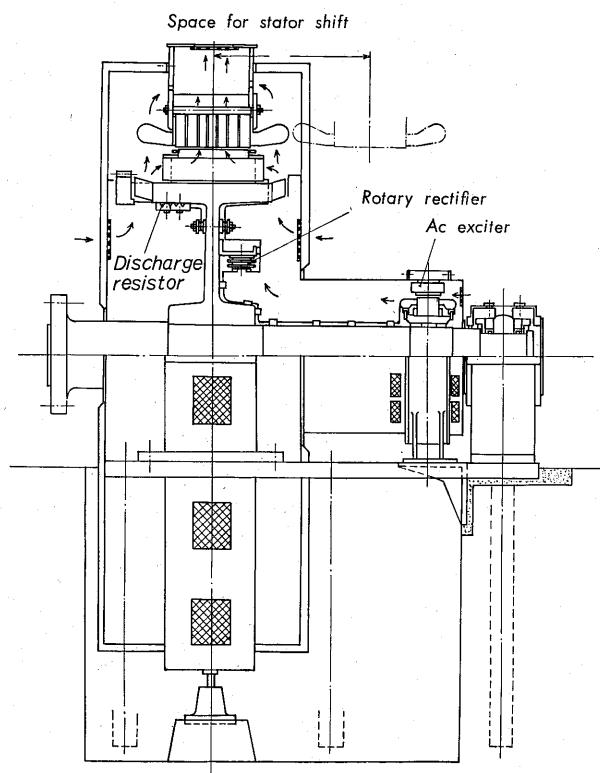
Sectional view of increased safety explosion-proof type brushless synchronous motor (5100kw, 22-poles, 327 rpm)
